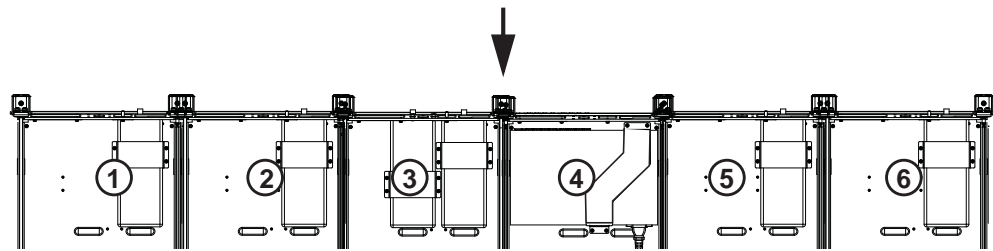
Where to detach chassis to move or expand a six-chassis frame
